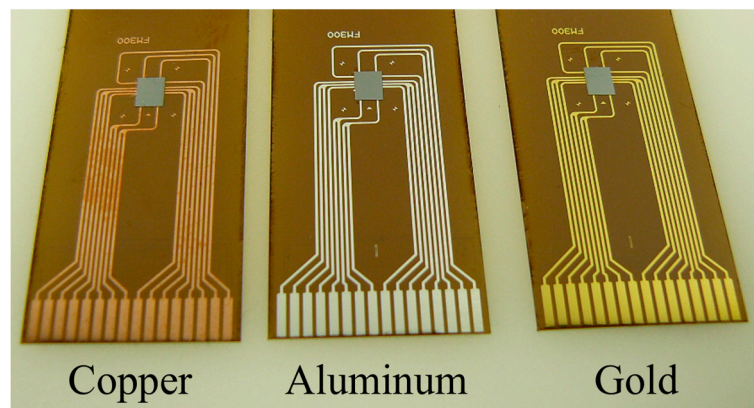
Chip-foil package test samples with copper, aluminum and gold interconnects.
